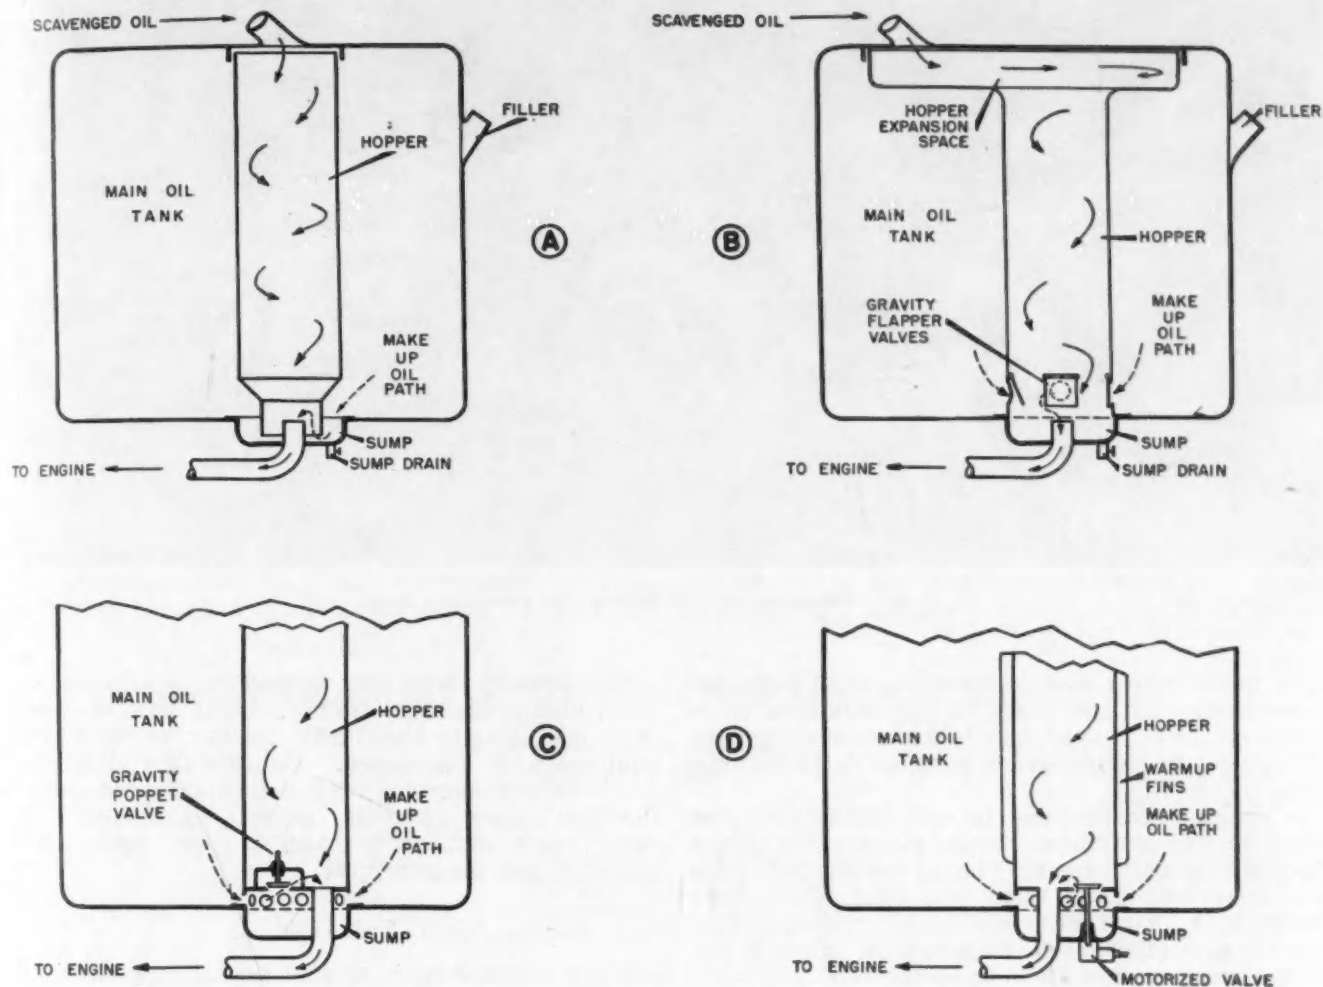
Oil tank hopper and sump details: A, initial design; B, first improvement incorporating expansion space and flapper valves; C, poppet valve replacement of flapper valves; D, positive segregating hopper
